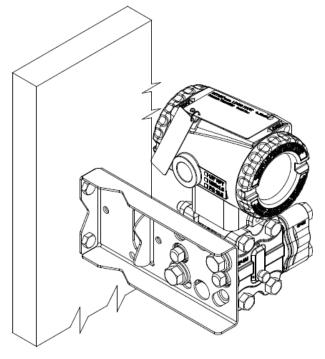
(f) – Dimensional Drawing and Mounting Position for the LD400 HART® – G Gage IN LINE
